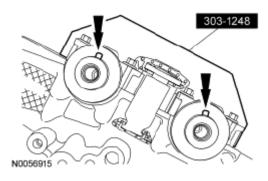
Installing Camshaft Holding Tool On Flats Of Camshafts Courtesy of FORD MOTOR CO.
